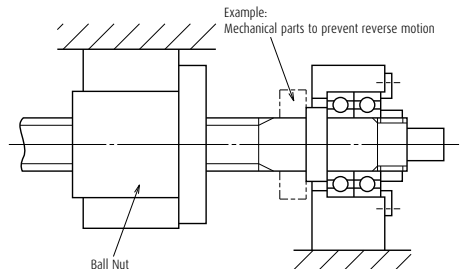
Nut and ball screw are required to be separated when installing in this structure.
